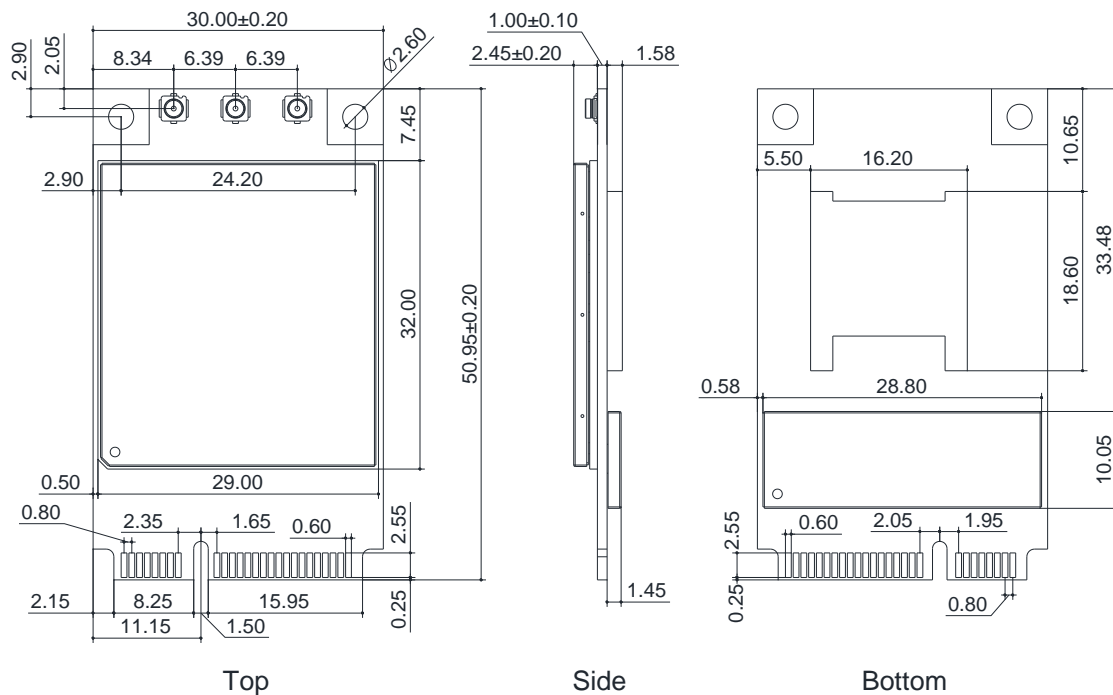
Mechanical Dimensions of EG25-G Mini PCIe
